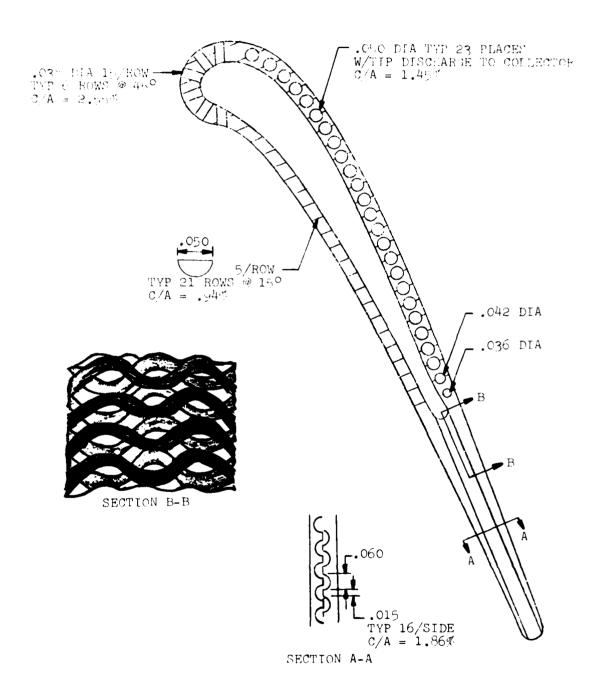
43.4% Reduced Solidity Radial Wafer Airfoil - Final Design
